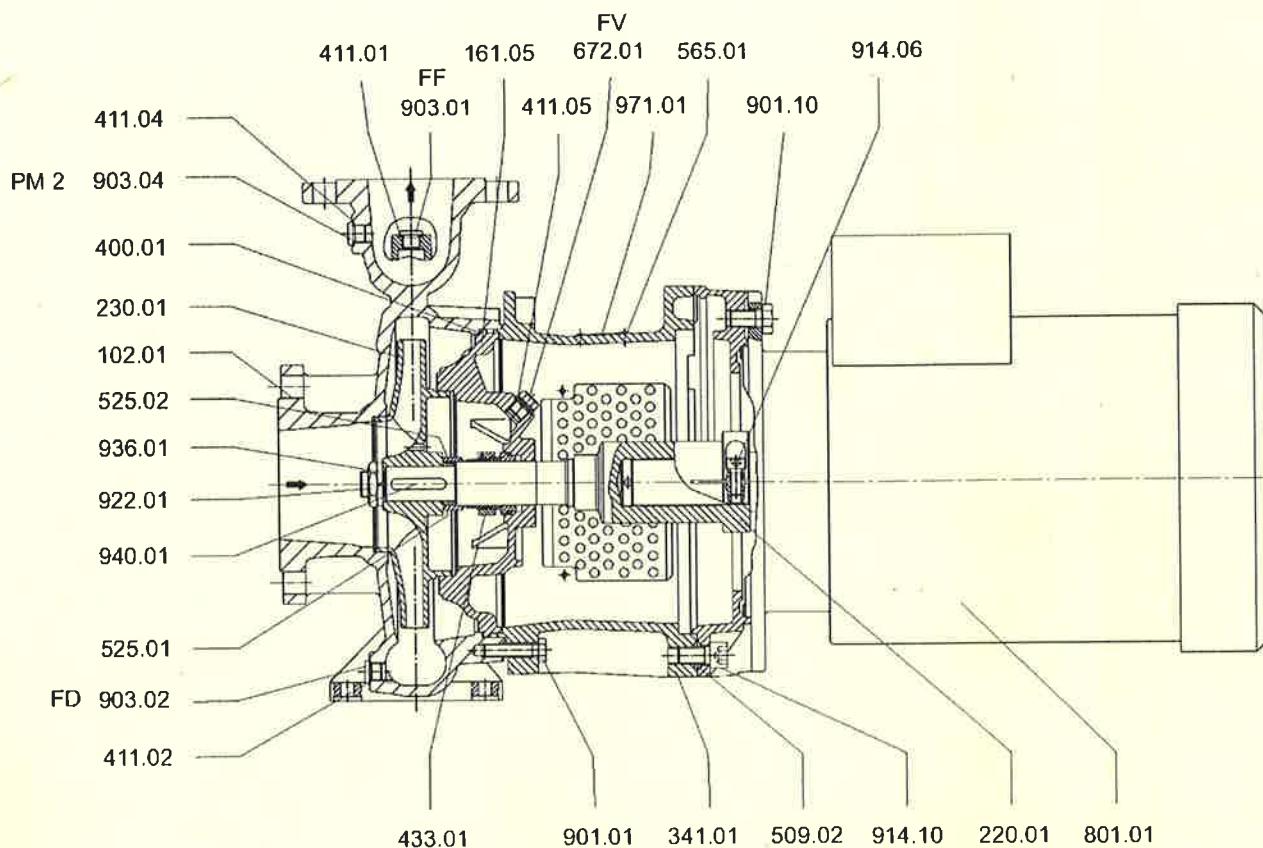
U3...D – Unbalanced mechanical seal – sizes with diameter 40 at the shaft seal
